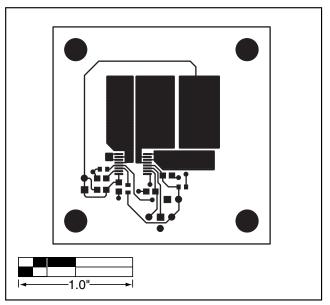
MAX1830 EV Kit PC Board Layout—Component Side
